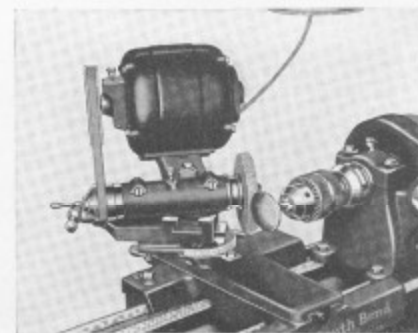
Refacing a Valve in the Lathe using Grinding Attachment and Valve Chuck.
